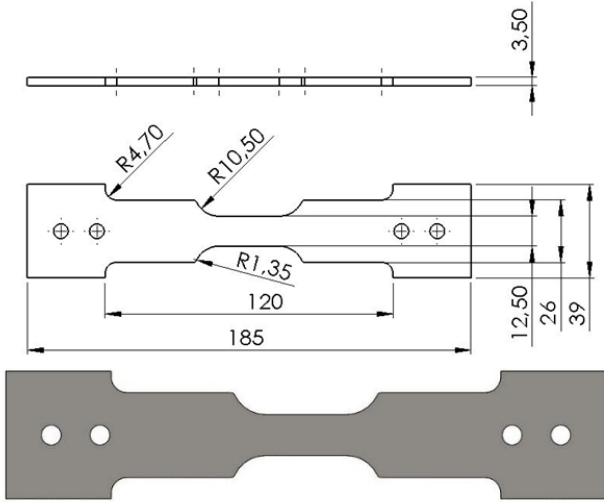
Cyclic loading sheet metal specimen technical drawing image and cad data image
